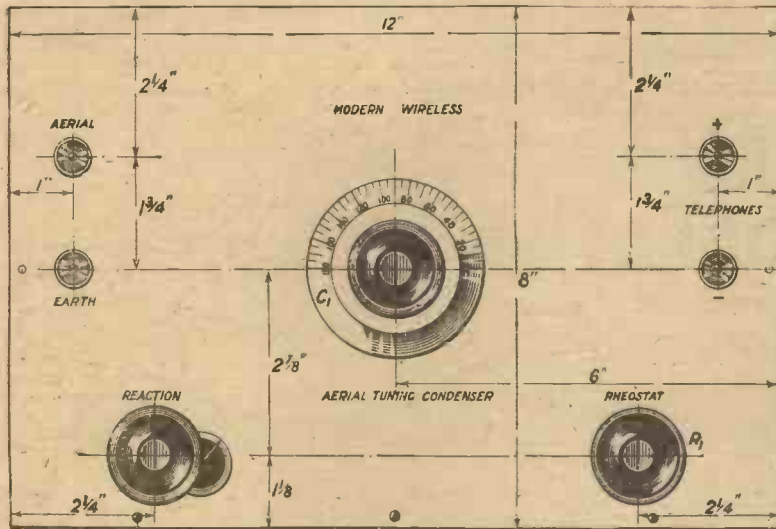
The layout of the panel is clearly shown in this diagram.
